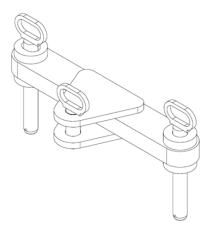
EXAMPLE OF A DRAWBAR ADAPTER
